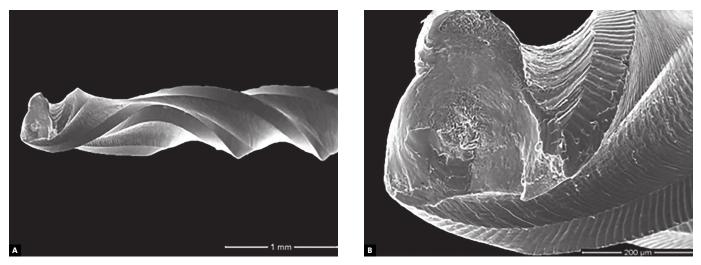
A) Helical shaft plastic deformation - ProTaper F4 file (100x magnification). B) Fracture surface and spiral reversion at fracture site (500x magnification).
